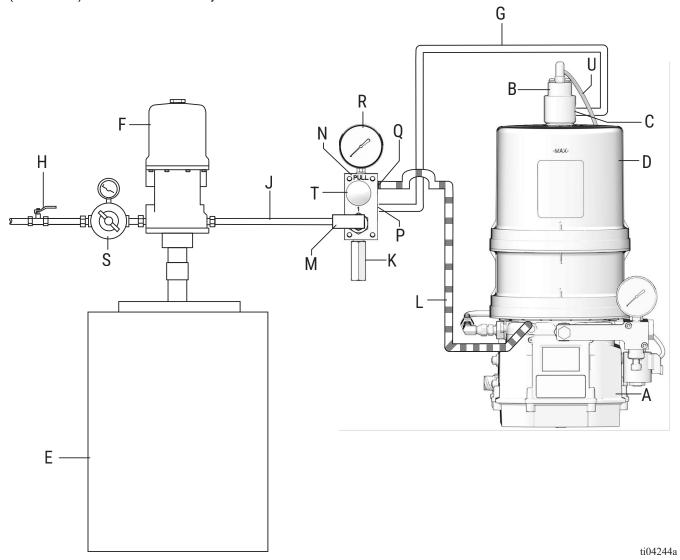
Components for G3 Max HF Automatic Lubrication Pump Fill With Auto-Fill Shutoff Valve and Remote Fill Manifold Typical Installation
